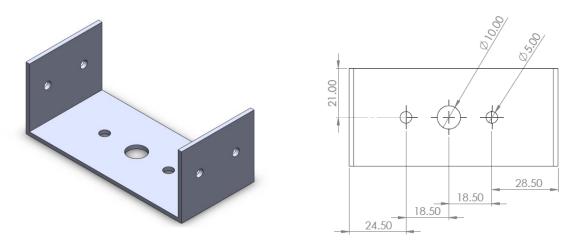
CAD Model and dimensions of Arm 2 motor mount upper part
